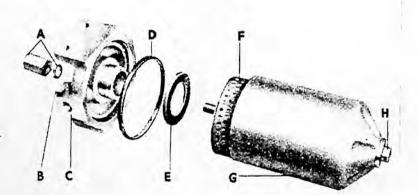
EXPLODED VIEW OF PUROLATOR FUEL FILTER
